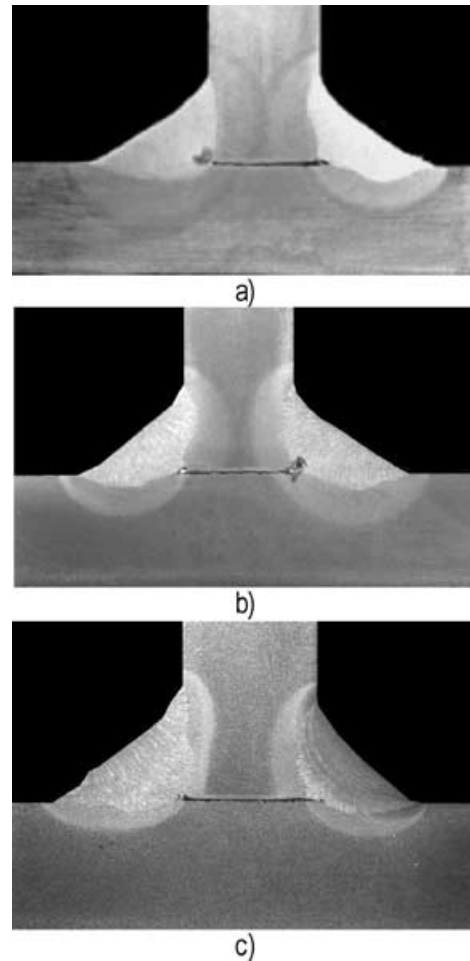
Macros of the welded joints. T-joint. St 52-3 steel (a) as-welded; (b) toe ground; (c) hammer peening at weld toe.
